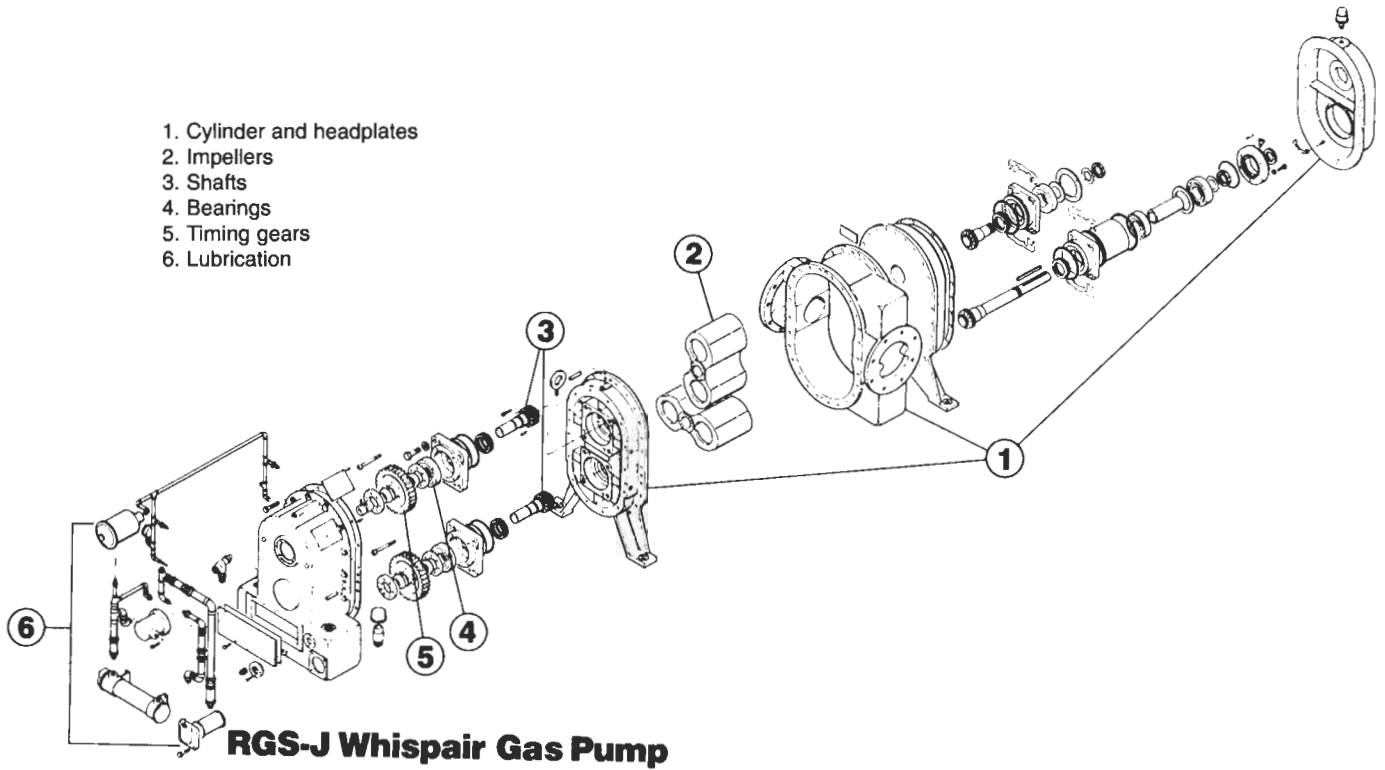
A. Exploded view of rotary lobe gas pump with mechanical seals and pressure lubrication for bearings. By permission, Roots Division; Dresser Industries, Inc.
